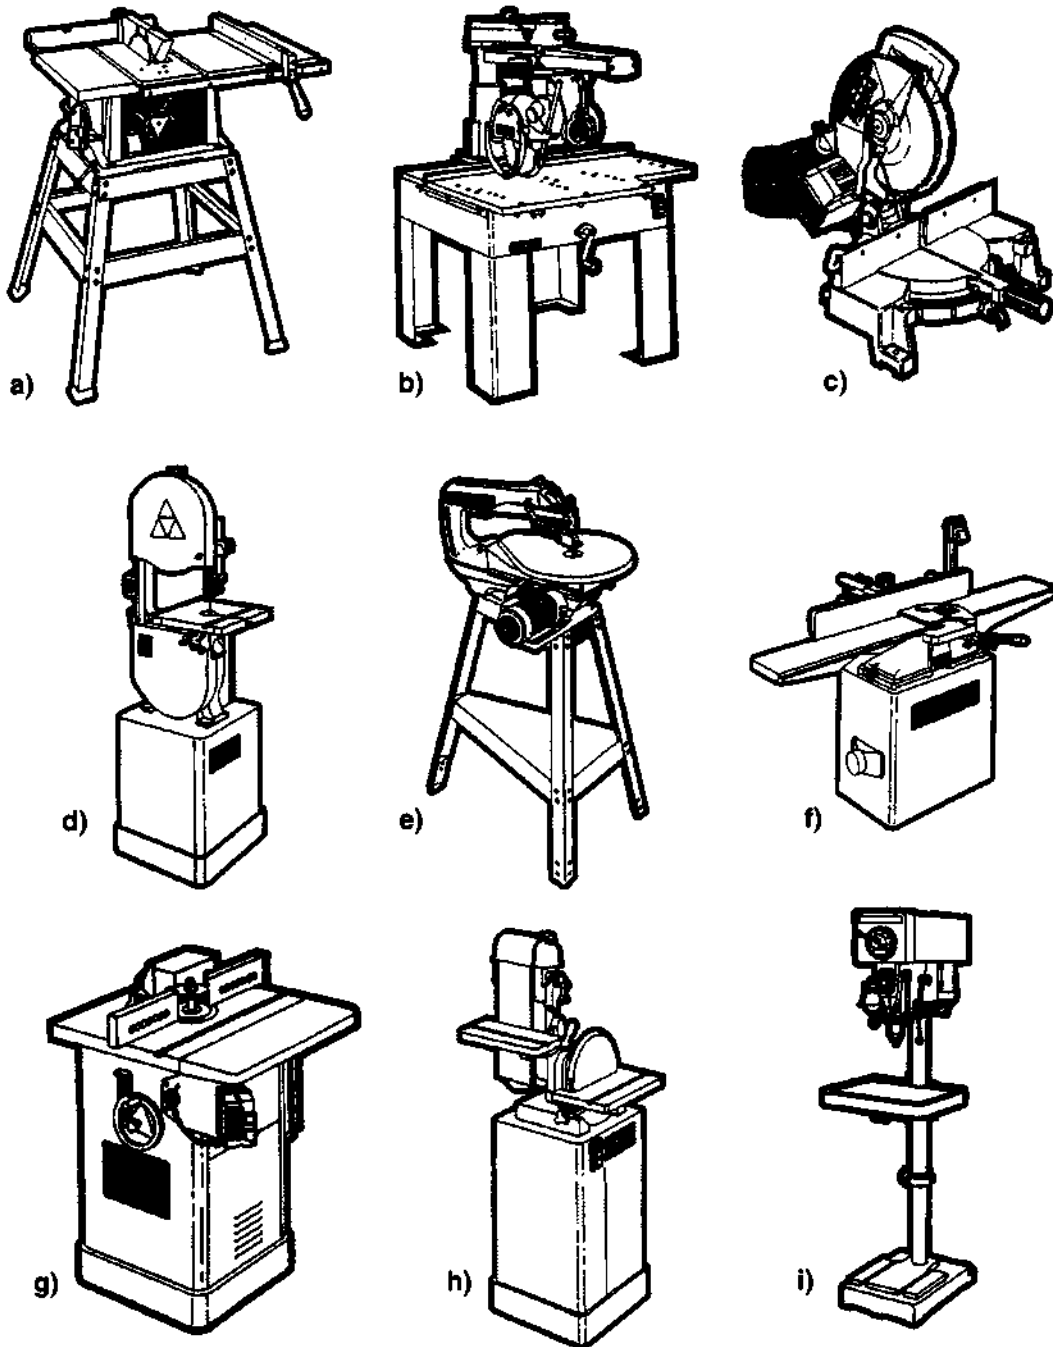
B Common equipment used in machining wooden components: a) table saw, b) radial arm saw, c) miter saw, d) band saw, e) scroll saw, f) jointer, g) shaper, h) combination belt and disc sander, i) drill press. (Courtesy Delta Machinery.)
